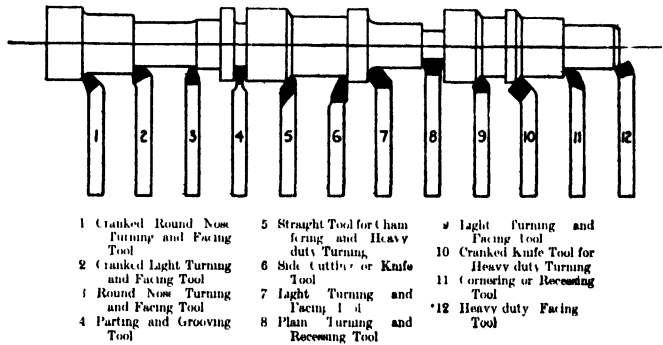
REPRESENTATIVE TYPES OF CUTTING TOOLS
